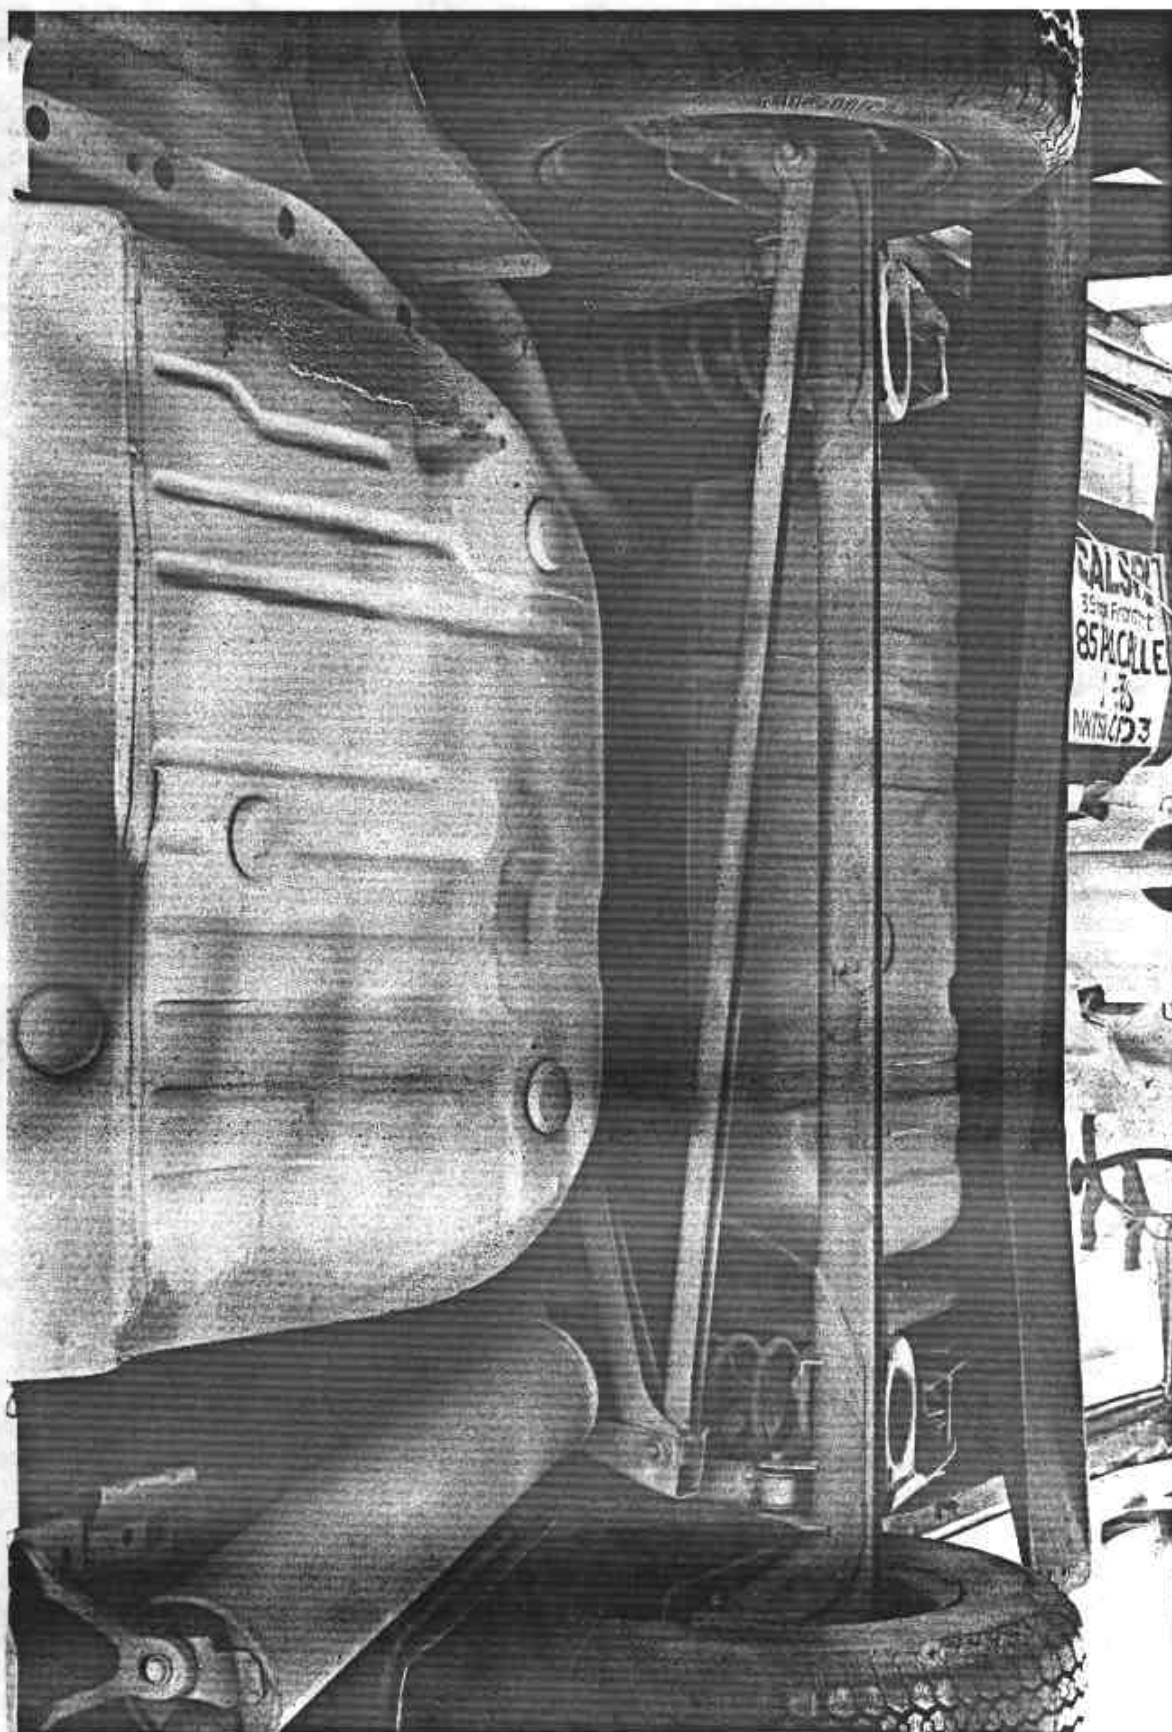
POST-TEST REAR UNDERBODY VIEW
